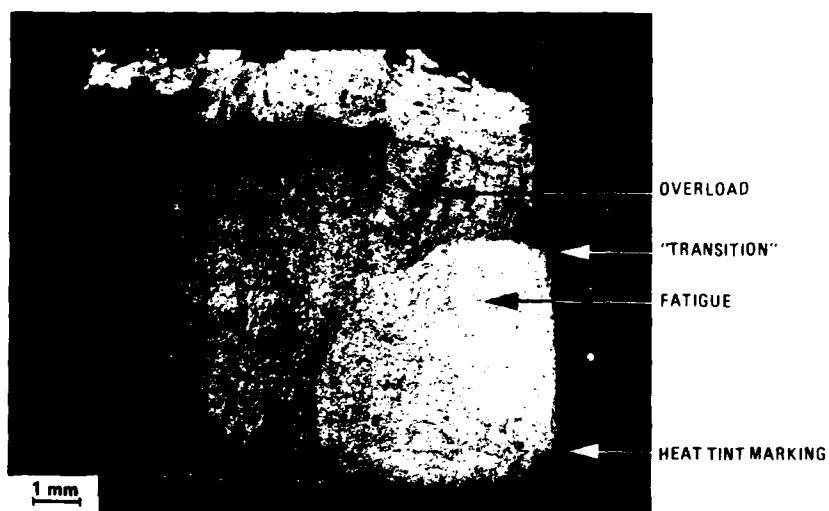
Markings on fracture surface of corner crack specimen
